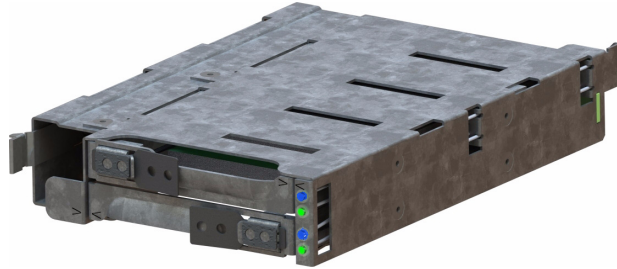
2.5" 9.5mm Drive Carrier (isometric view with dual thumb-latches)
